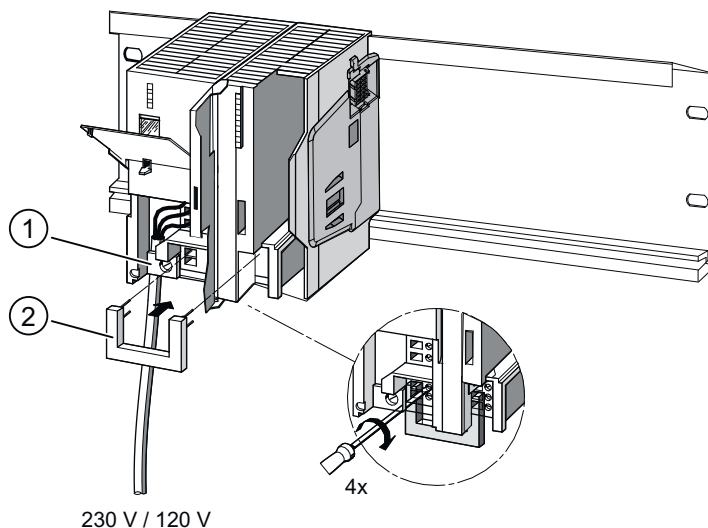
Wiring the PS 307 power supply module and IM 650 with connecting comb
